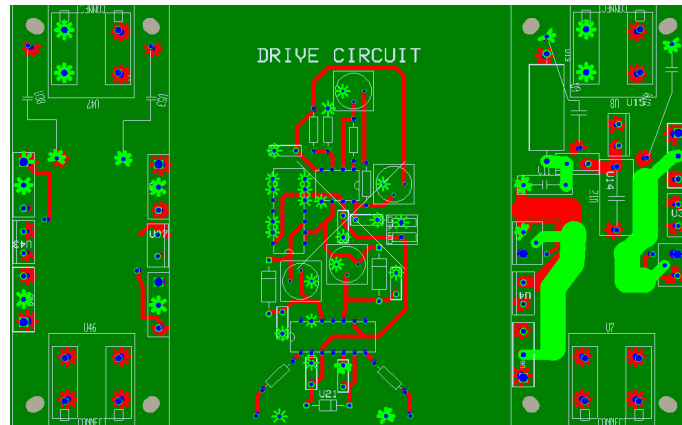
PCB layout with both side copper layers and silk screen as seen in CADint PCB
